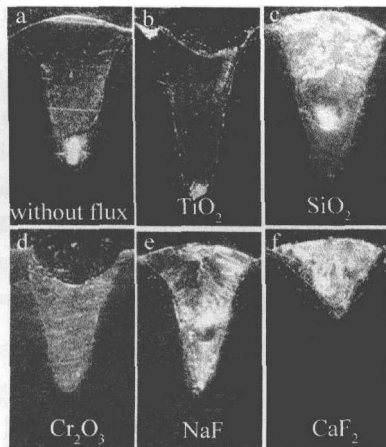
Macro-morphology of welding joints with and without fluxes(35 ×)
